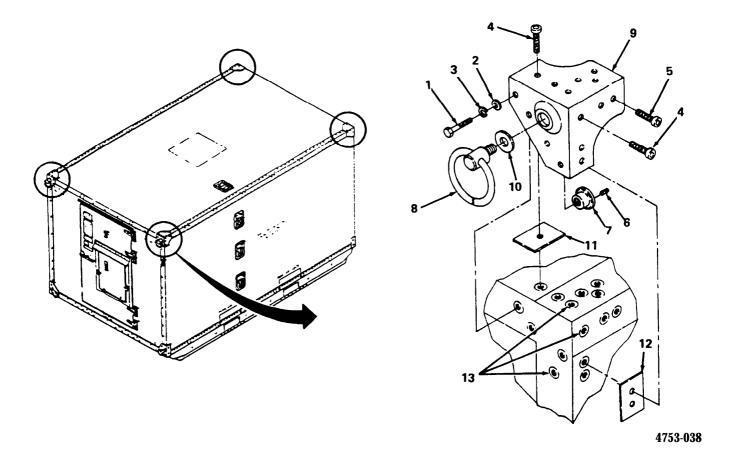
Lifting Eye Assembly Repair and Replacement.
